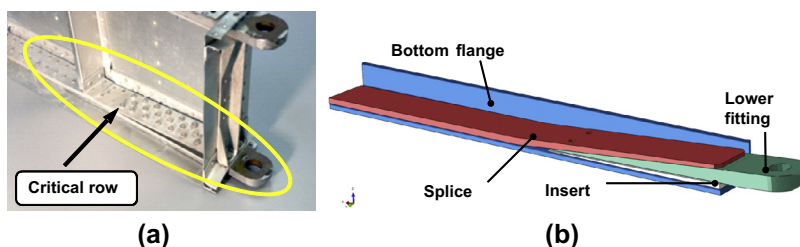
(a) Root spar assembly view and (b) Lower root flange assembly – 3D model.
